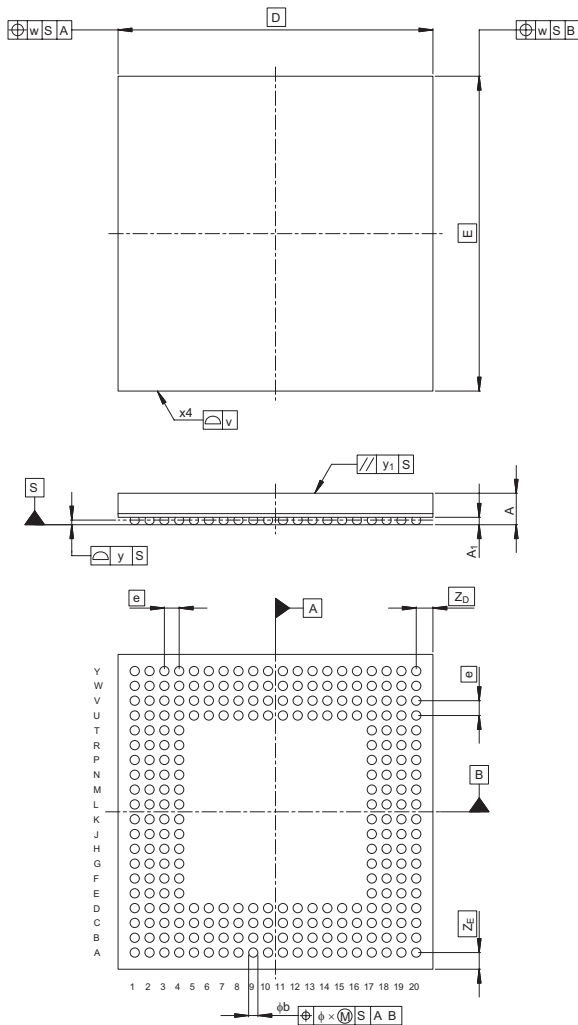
Package Dimensions (BP-256F/BP-256FV)
